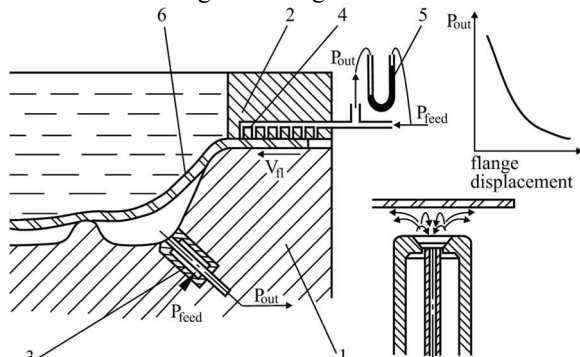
Variants of air jet gage location for controlling parameters of forming: 1 – jig; 2 – pressure plate; 3 – transducer for determination gapping between blank and die; 4 – gage for determination of flange drawing; 5 – micro-pressure gage; 6 – blank
